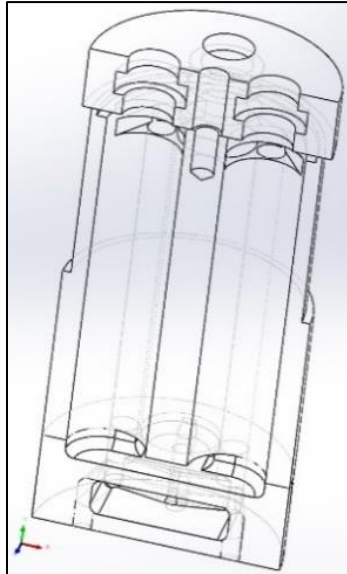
Section view of the inner housing of a module. Depicts the base part and the lid, without the enclosed pins for better visibility
